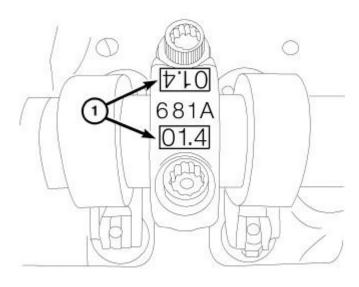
Front Camshaft Cap Courtesy of CHRYSLER LLC
